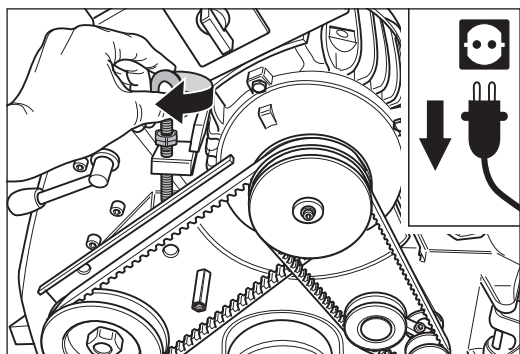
Put the V-belts back on and tighten them with the tensioning bolt at the motor.
